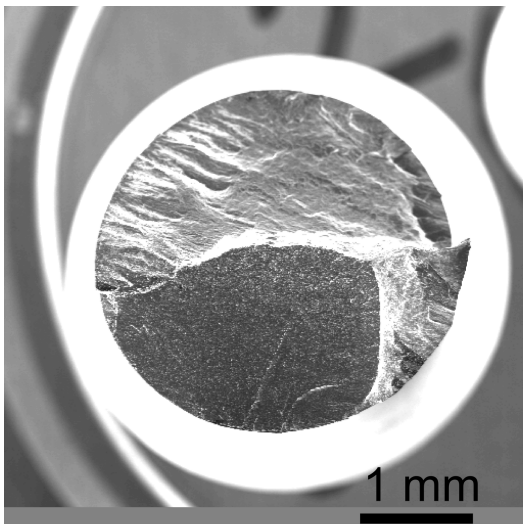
View of a fracture surface of AZ31ECAP, segmentation of the fracture surface, $\sigma_a = 110$ MPa, $N_f = 11\ 162$ cycles.
